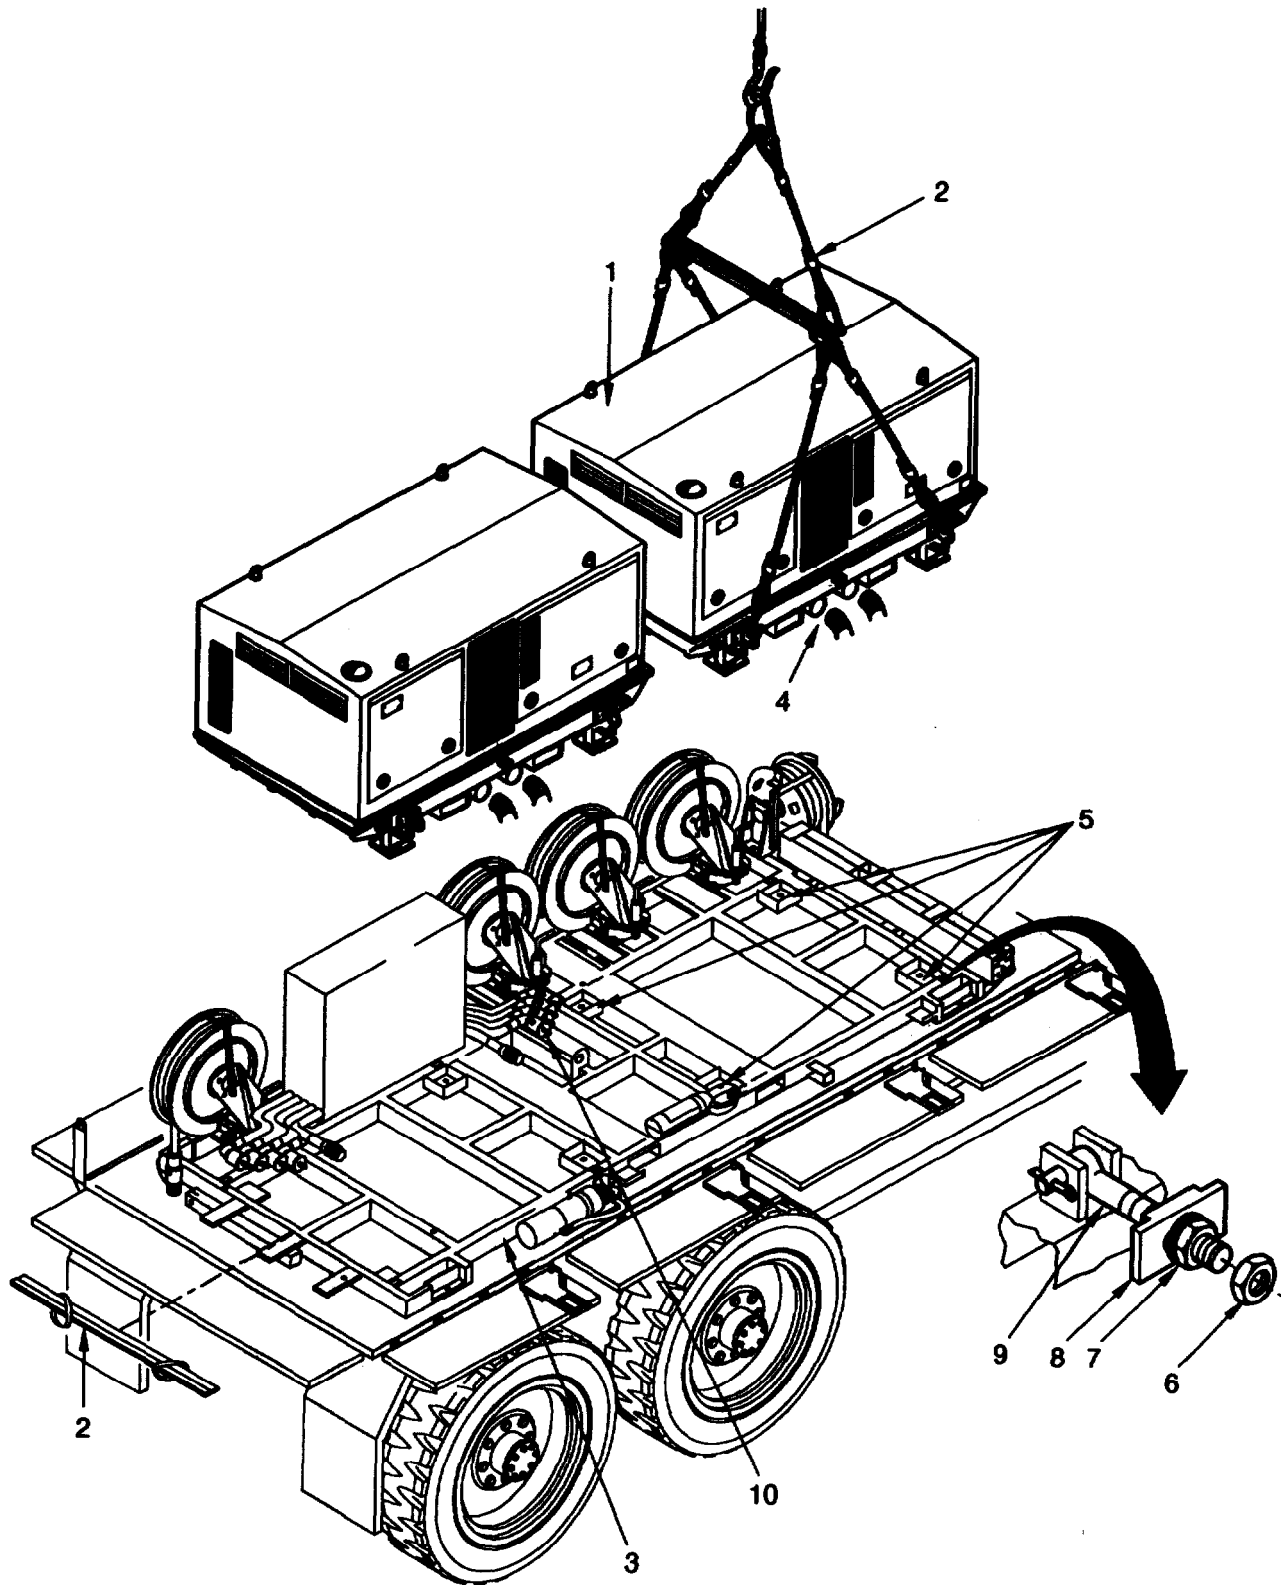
Removing a Generator Set 150 kW from Pallet Frame using a Crane.
